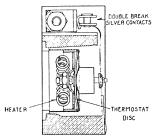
Sectional View Type MW Overload Relay with Reset Rod Removed
